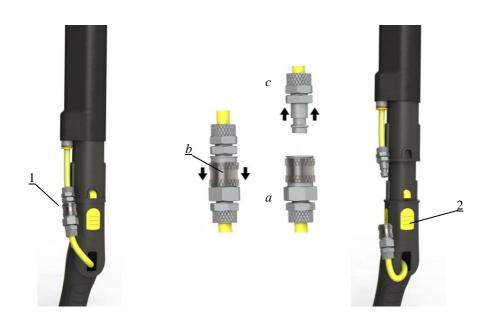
Yellow feed pipe disconnection: 1 – quick connector: a – socket, b – spring lock, c – plug 3 – headpiece locker.
